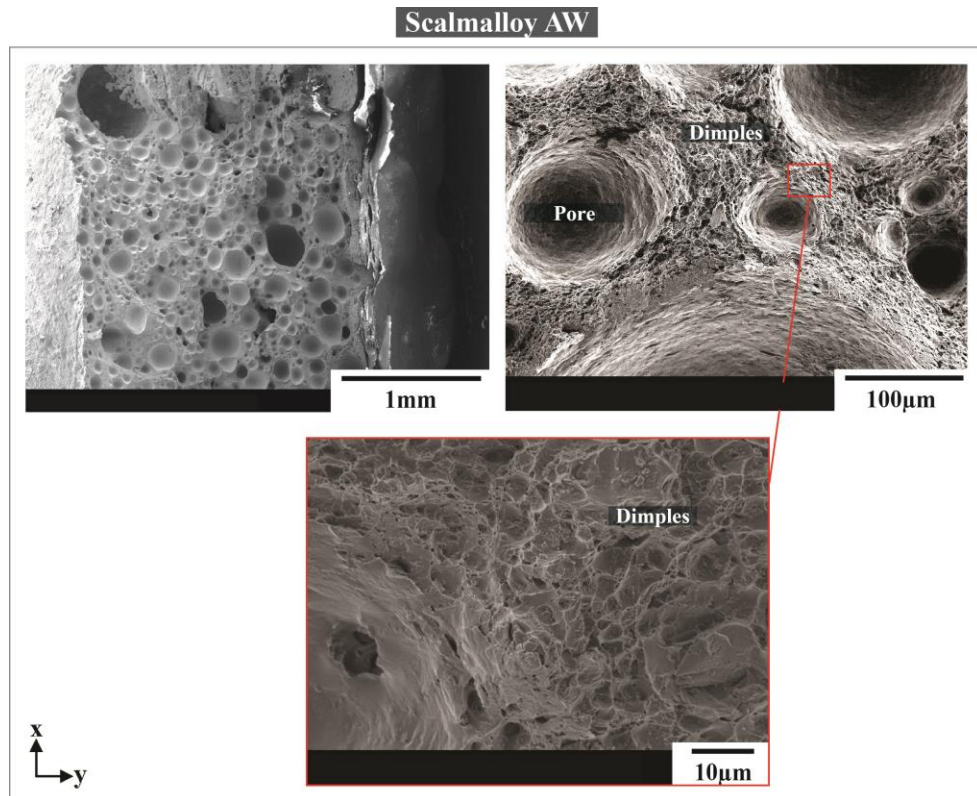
Fracture surfaces and fractured samples for Scalmalloy as welded joint
